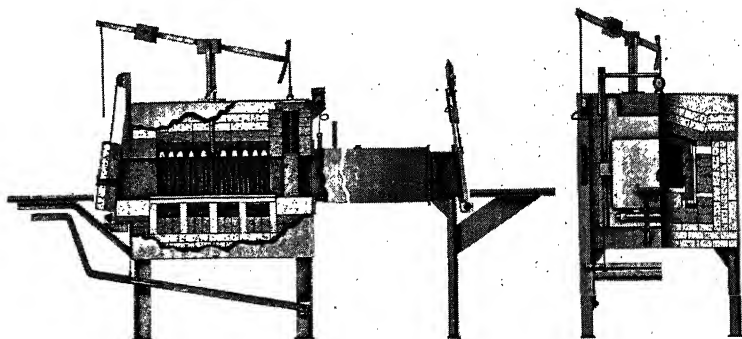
Brazing furnace with two doors. (Courtesy *Westinghouse Electric and Manufacturing Company.*)
